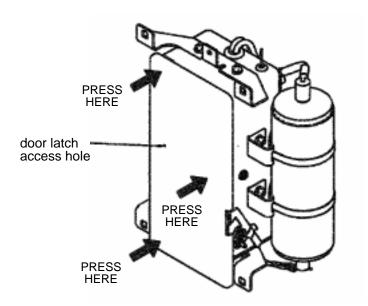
Closing the Door on the Lavatory Mask Assembly
